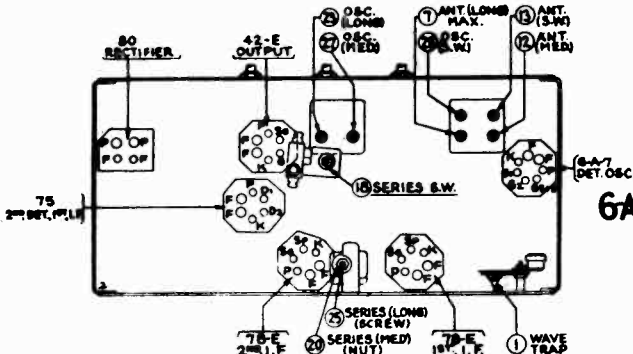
View of Tube Sockets and Compensating Condensers underneath Chassis.
